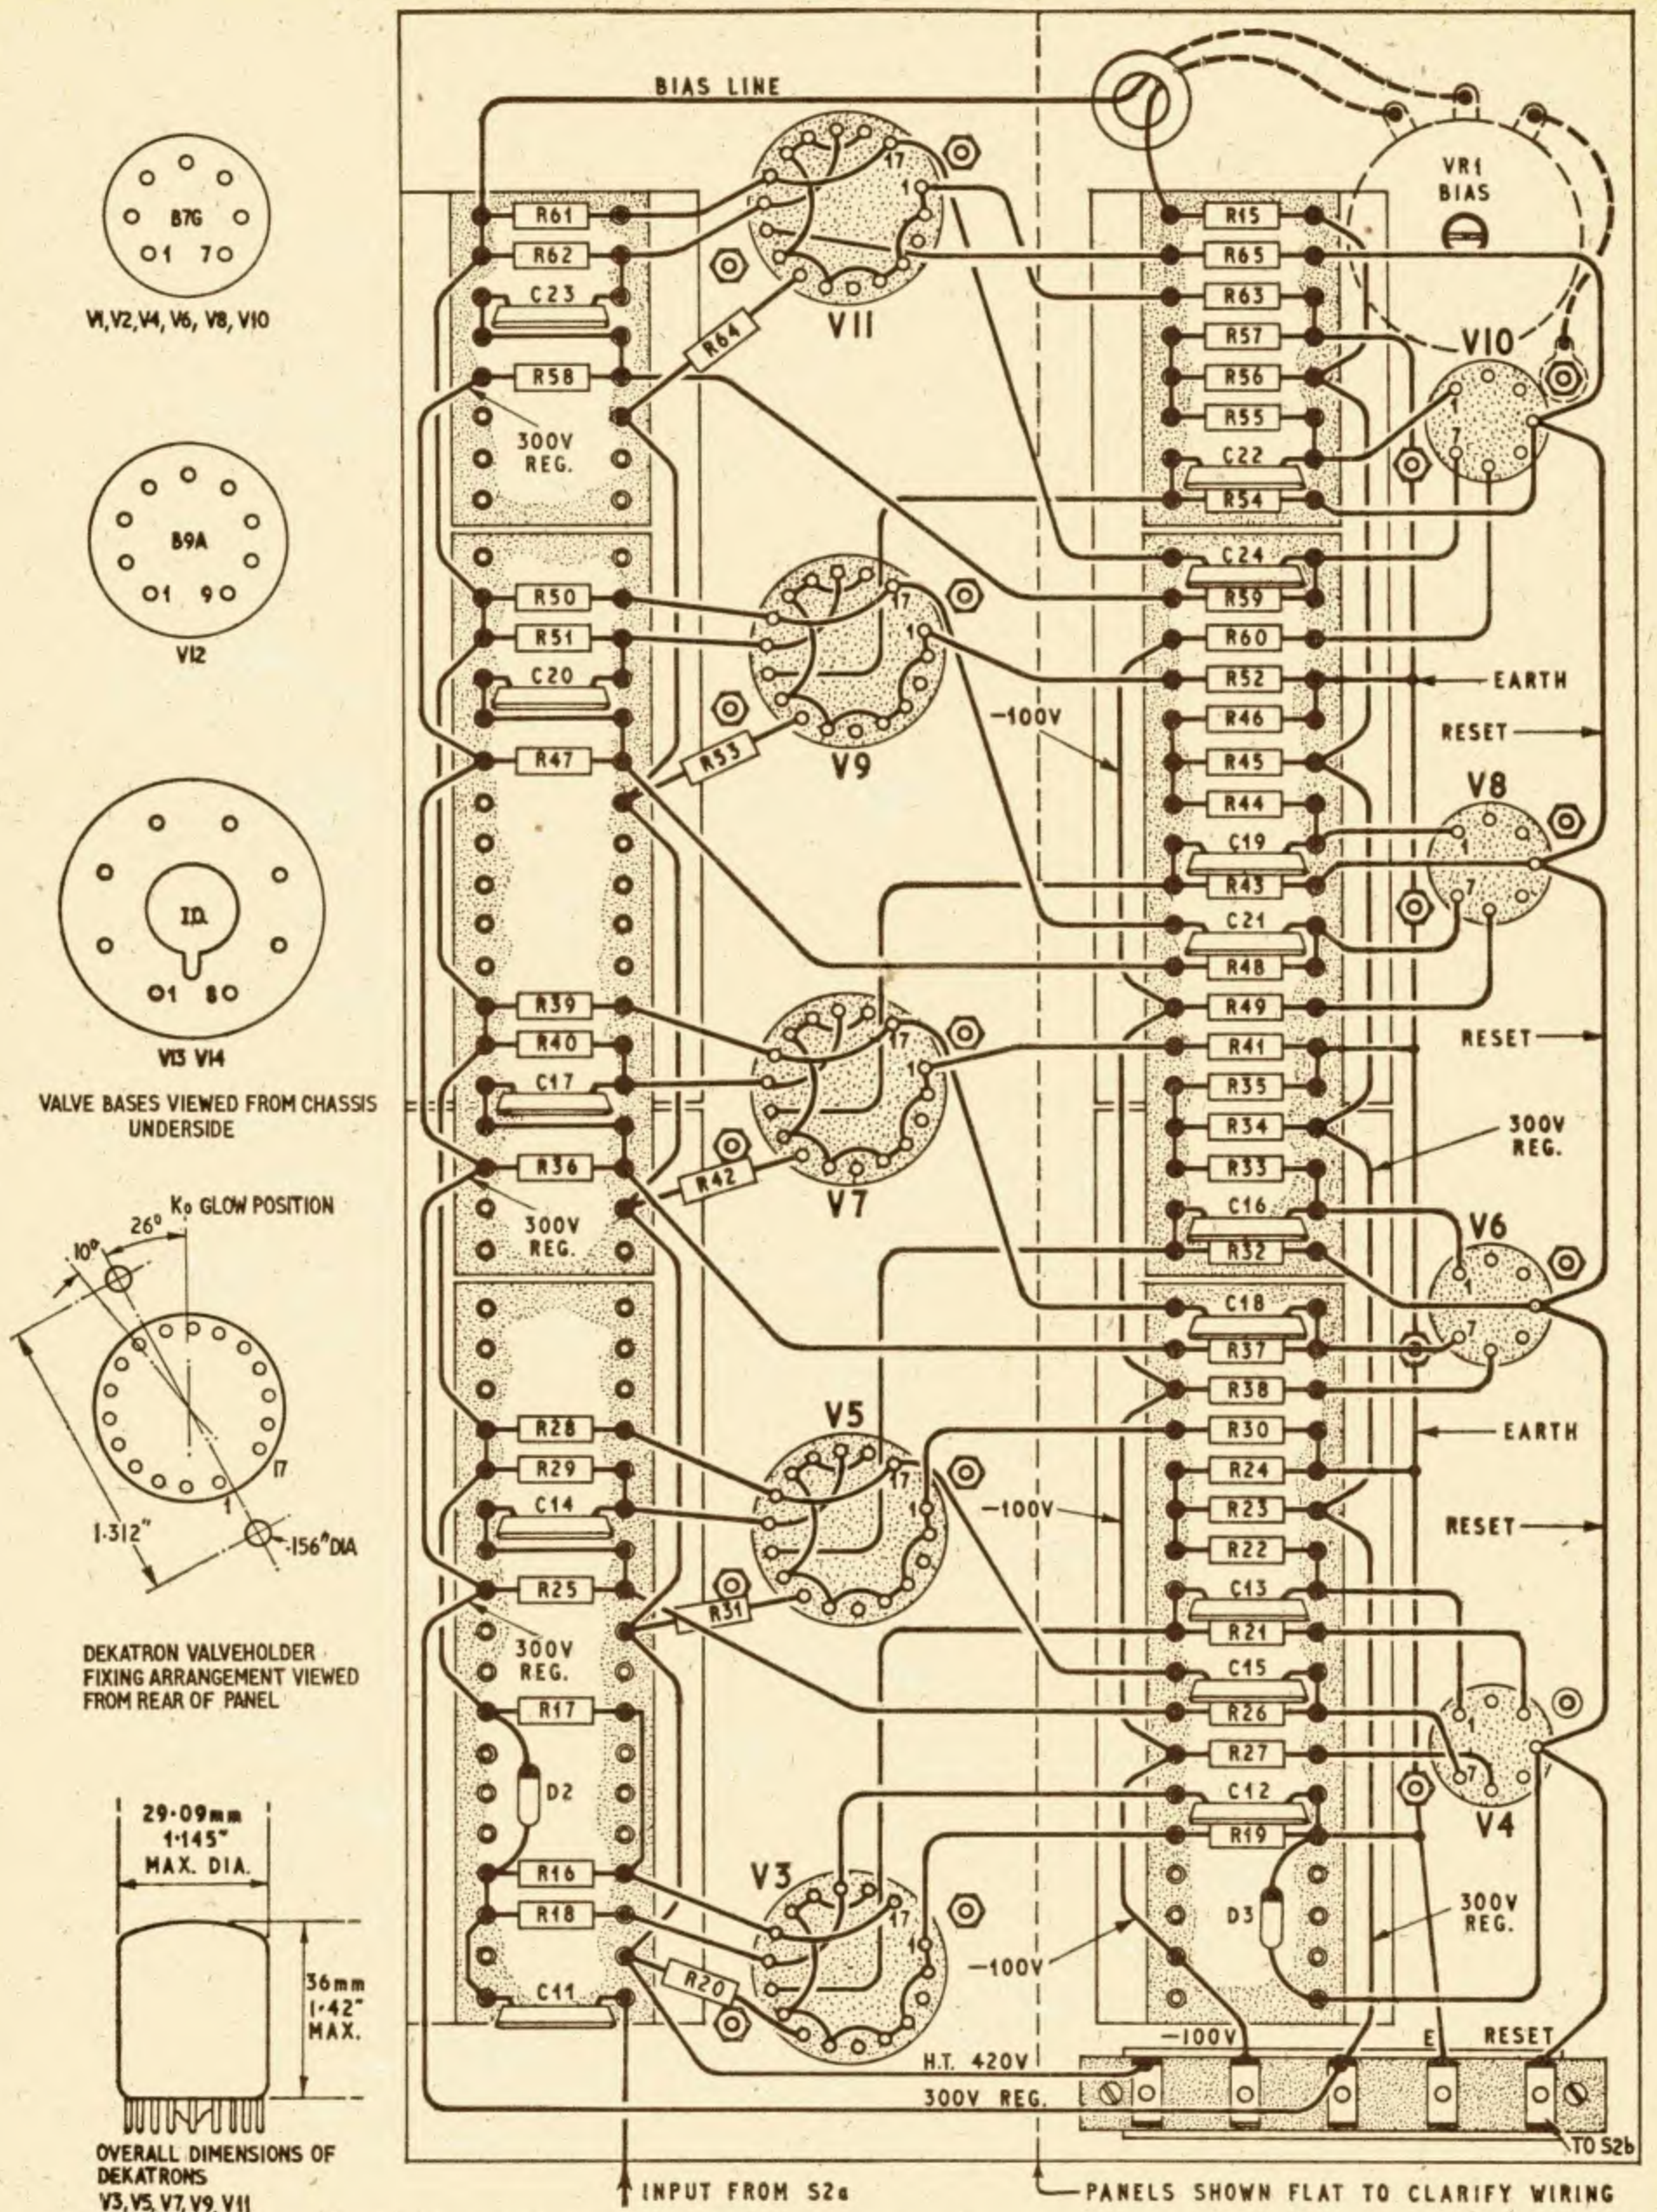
Display unit chassis (opened flat) showing layout of tag boards, components, and wiring. The dotted line through centre of diagram indicates the junction of the two panels which form the L-shaped assembly
